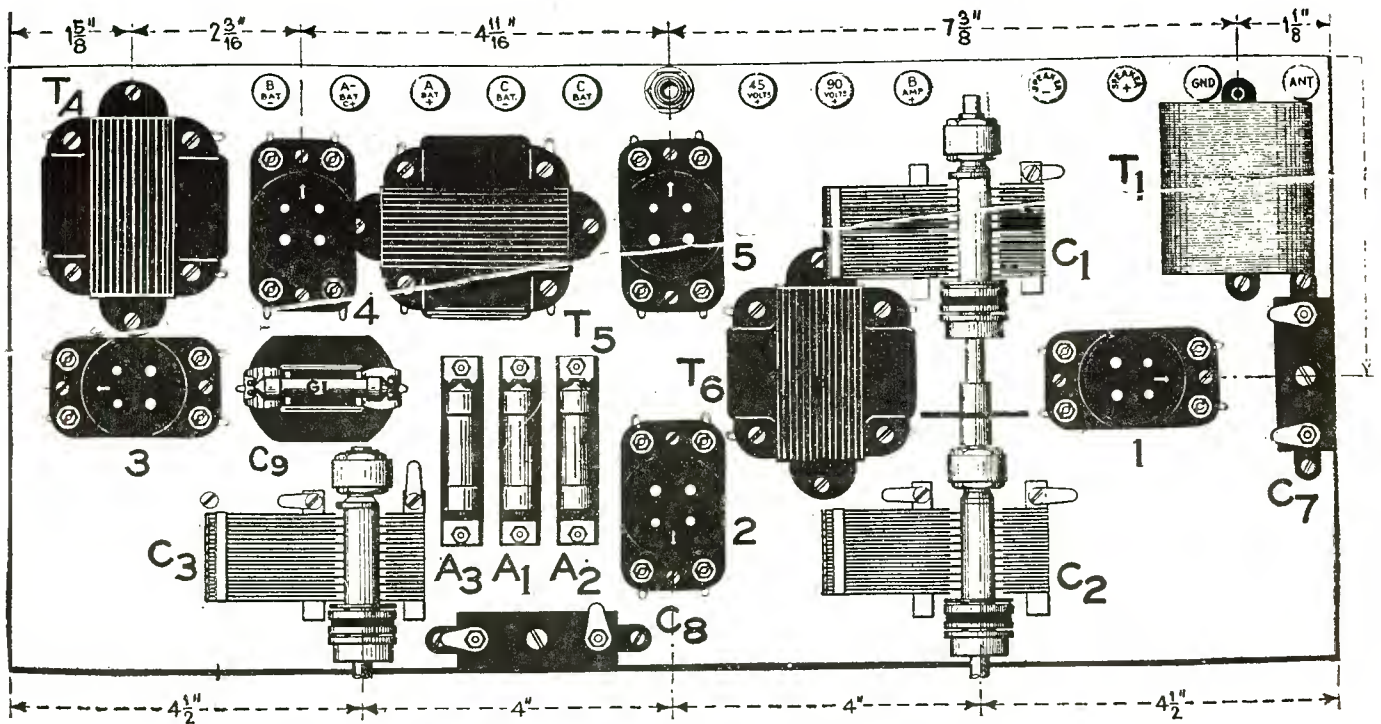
Top view of sub-panel with all parts mounted in correct places.
